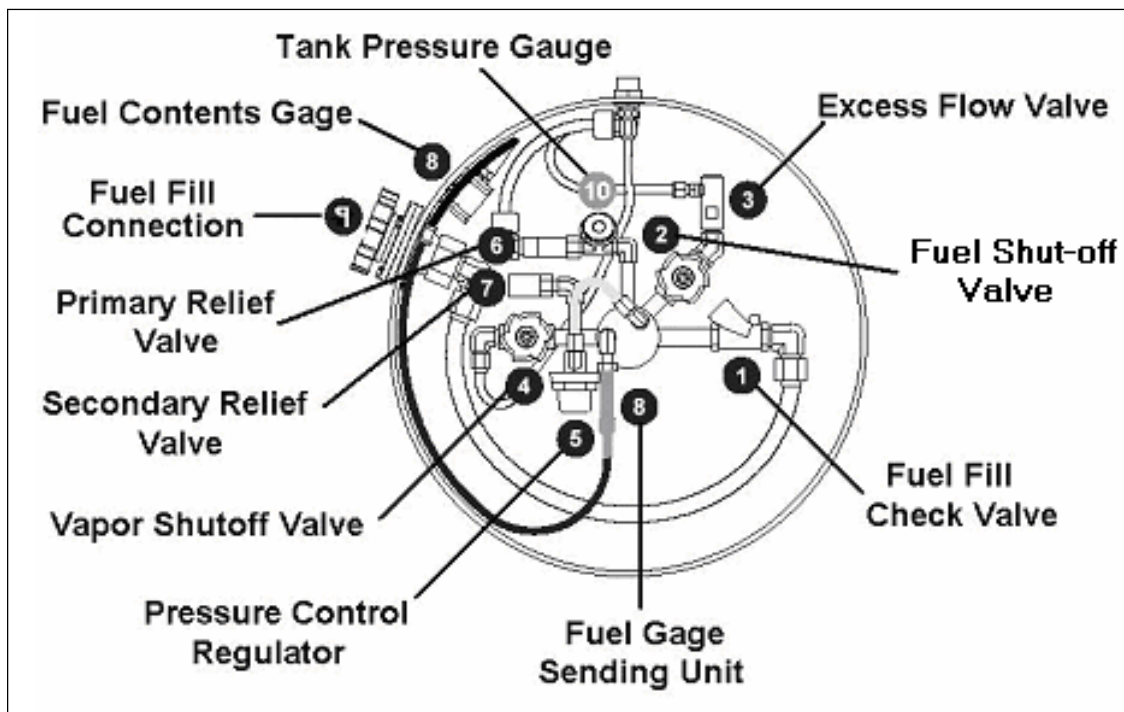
Truck/Tractor Style Shrouded Tank Components
